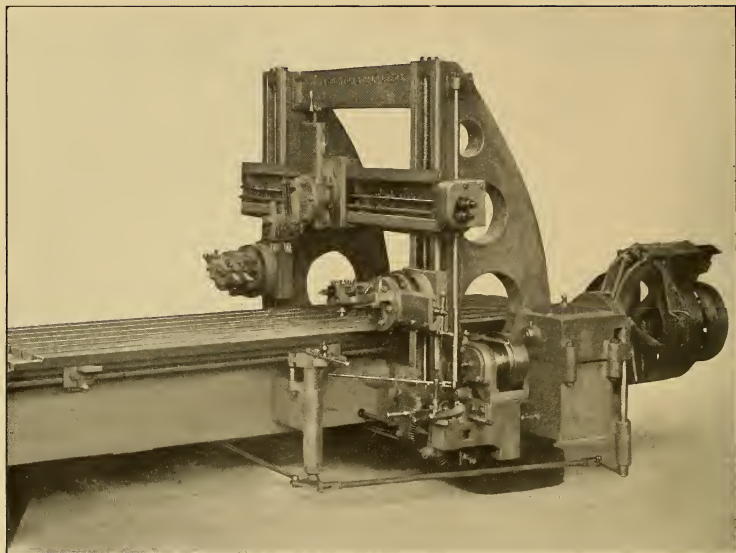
A PLANING MACHINE WITH THREE DOUBLE-CUTTING TOOL BOXES. MADE BY MESSRS. JOSHUA, BUCKTON & CO., LTD., LEEDS, ENGLAND
